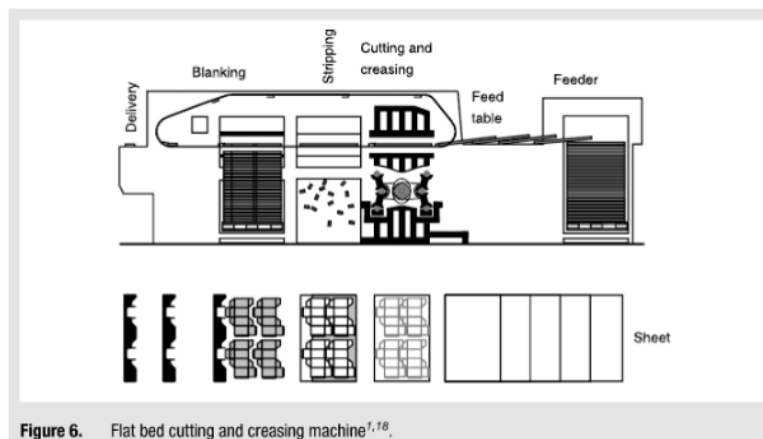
Flat bed cutting and creasing machine<sup>1,18</sup>.
